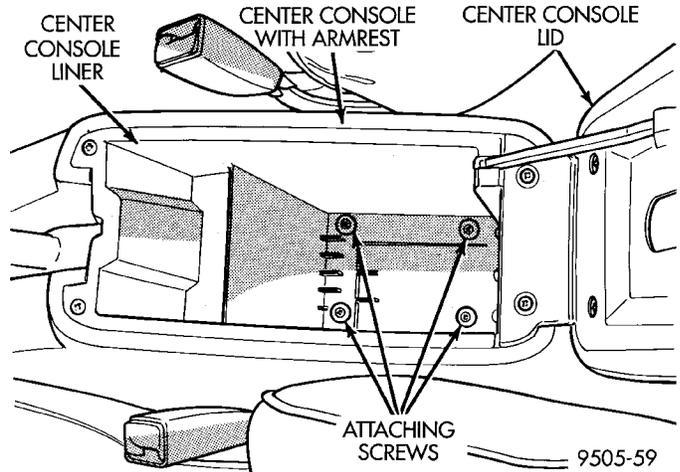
Center Console Rear Attaching Screws With Arm Rest
